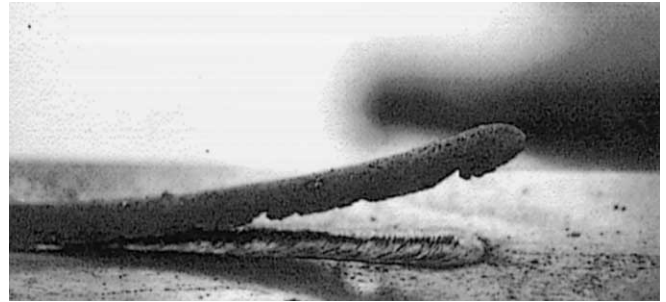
Convenient self-peeling slag removal with RB-26 assures a glossy bead appearance without post-weld brushing
